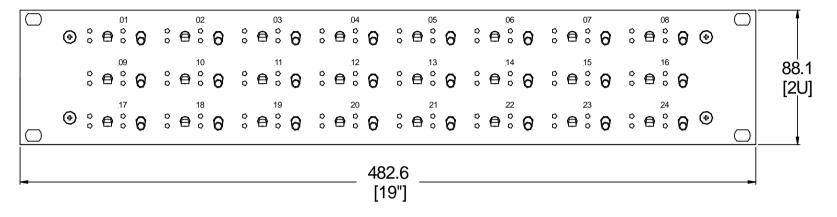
N2400 chassis front panel with toggle switches (early models only). Dimensions mm.
